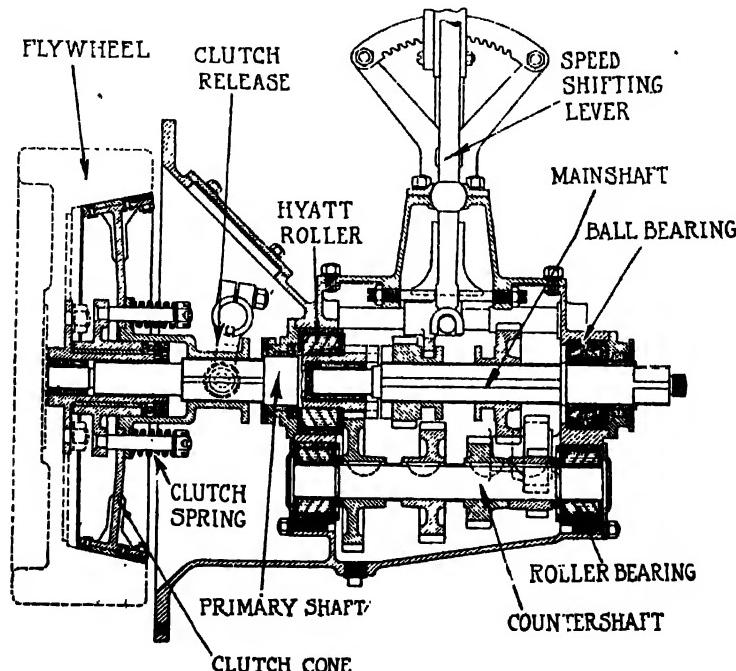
Sectional View, Showing Gear Box and Clutch Assembly, Forming Part of Unit Power Plant.
